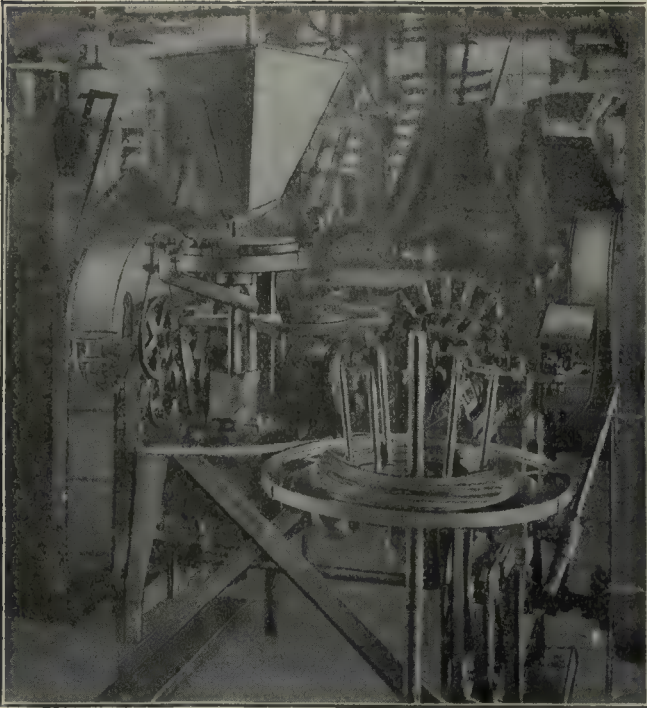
AUTOMATIC MACHINE FOR MAKING SAFETY PINS (REAR VIEW)
